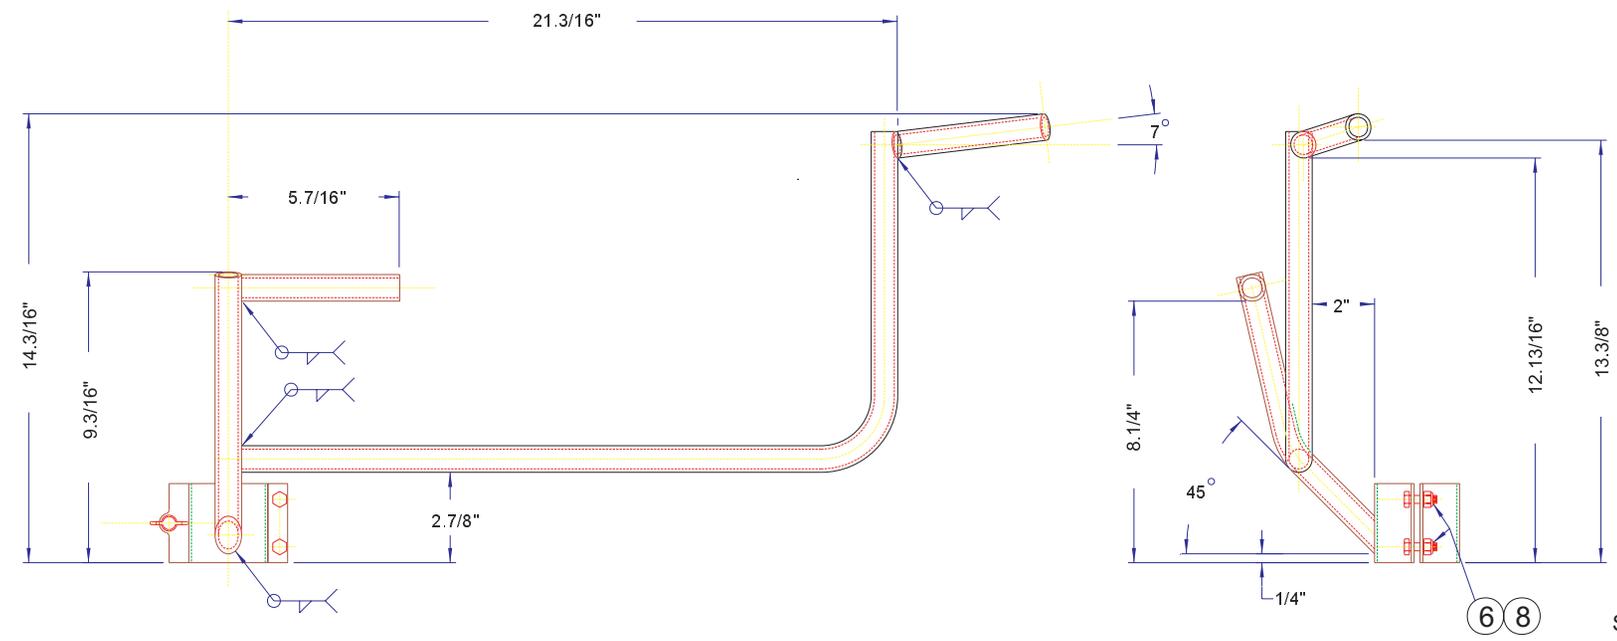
C - Handlebar: Leaf Blower Details.
